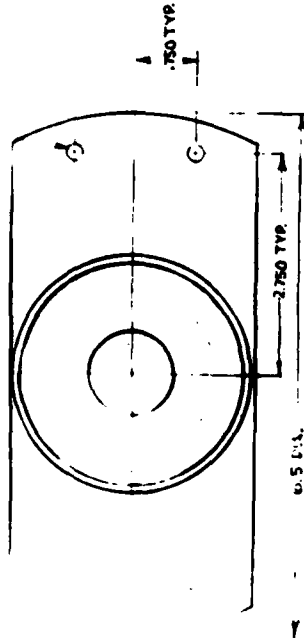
Encoder Mounting Shaft - Azimuth Axis.
